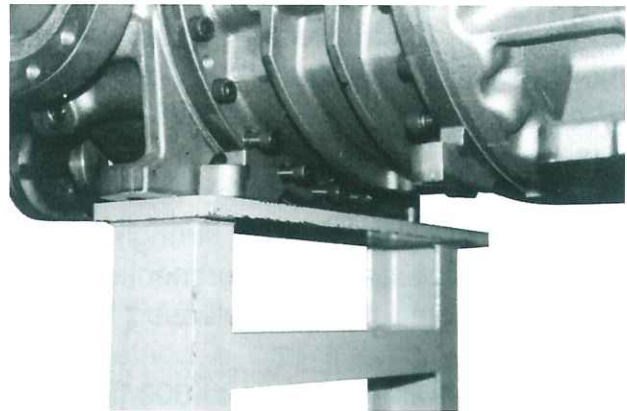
Drawing Out Lower Flange Fitting Bolt
